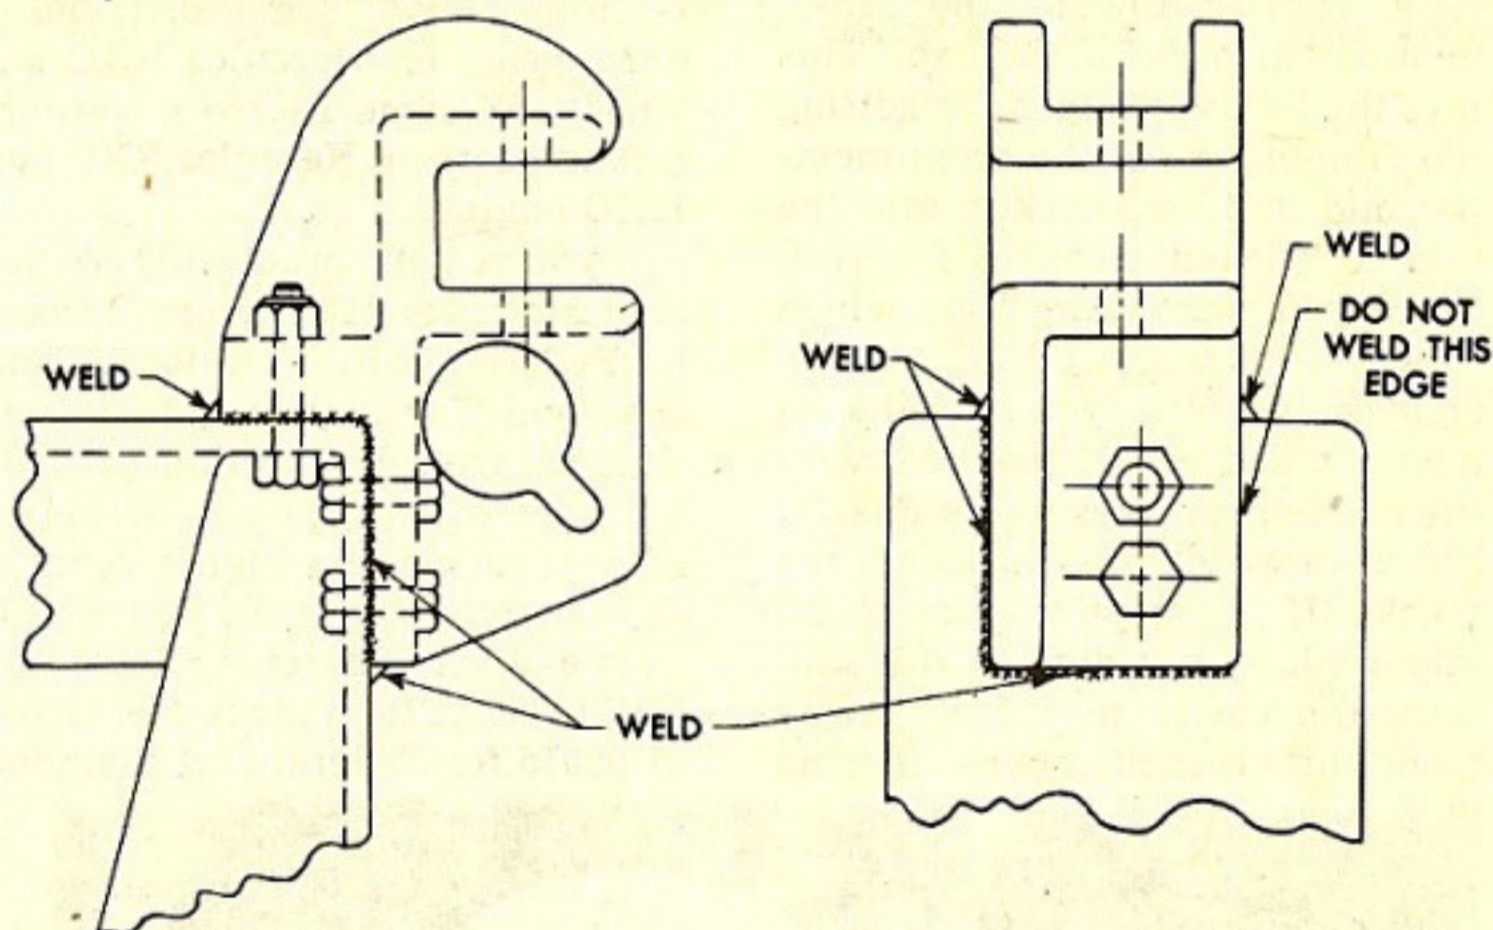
Welding the tailgate bracket will hold the bolt tight.
